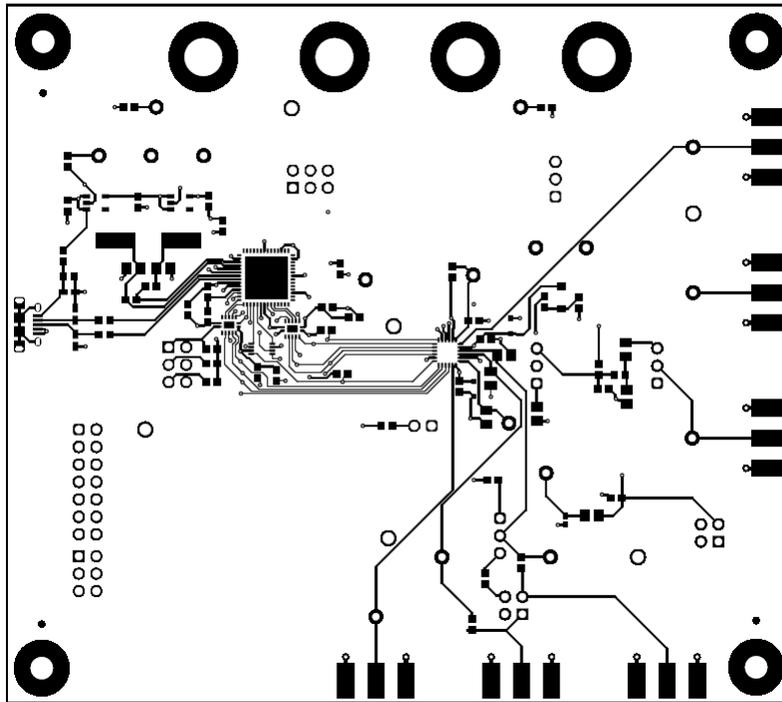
AFE881H1EVM PCB Top Layer Layout
